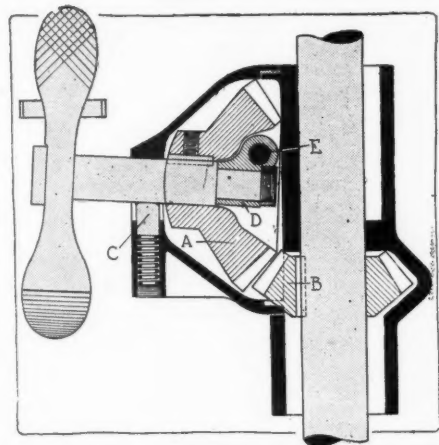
Vertical section through auxiliary pedal steering mechanism
